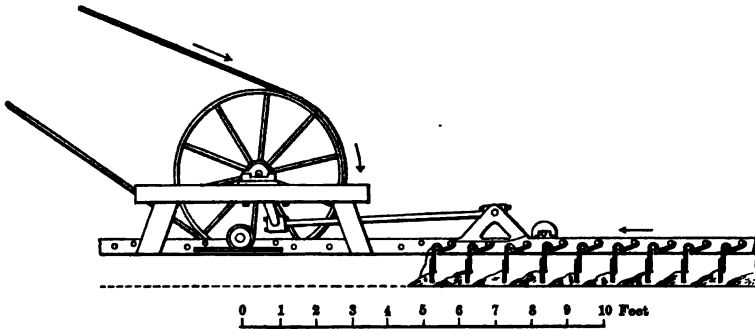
PUSH CONVEYOR, FORWARD STROKE.
